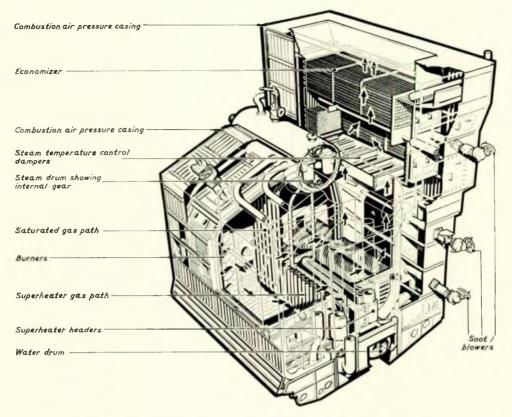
Rear cutaway view of Guided Missile Destroyer boiler
